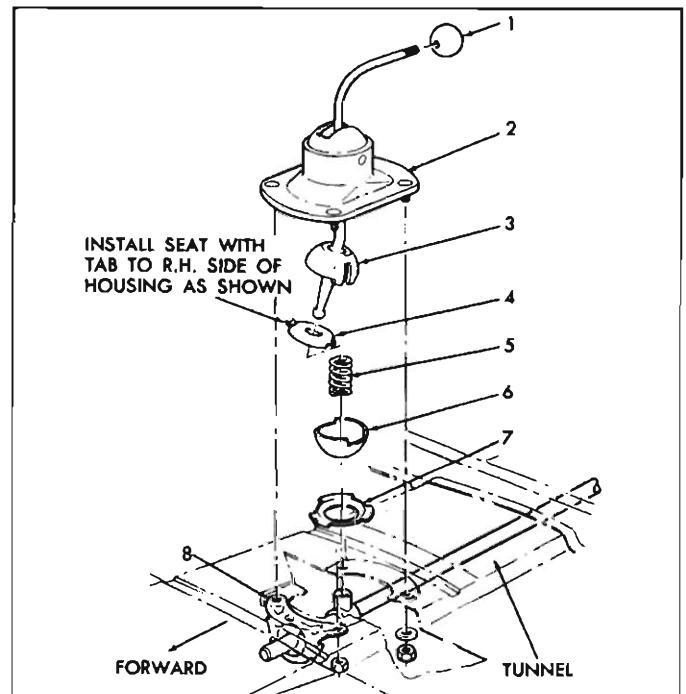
D1—Gearshift Lever Assembly—Exploded View
